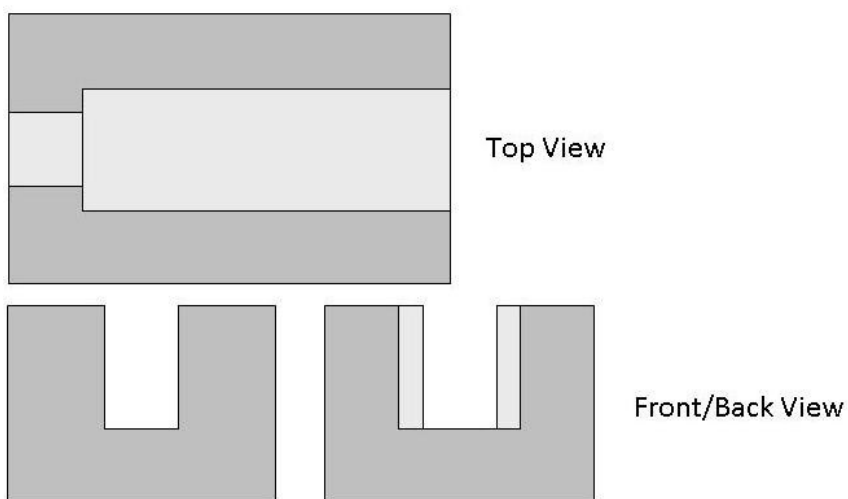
Schematic of casing used to assemble the thin layer cell.
